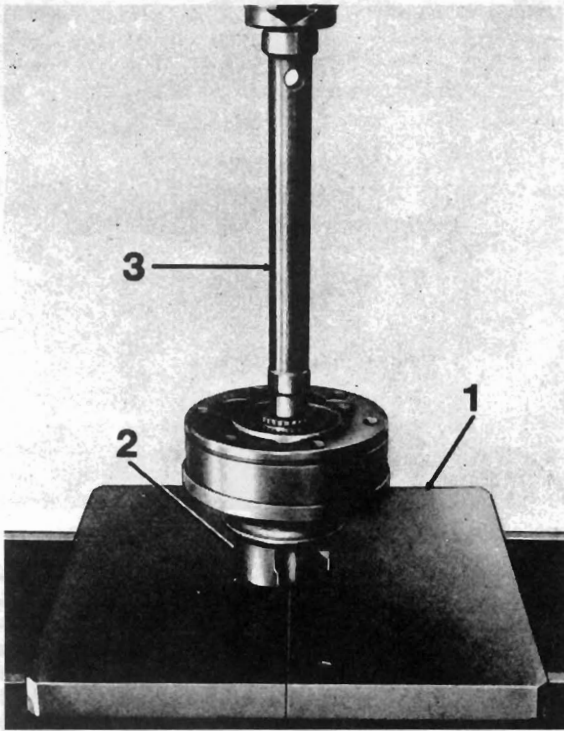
Pressing driveshaft out of CV bearing (Sec 6)
